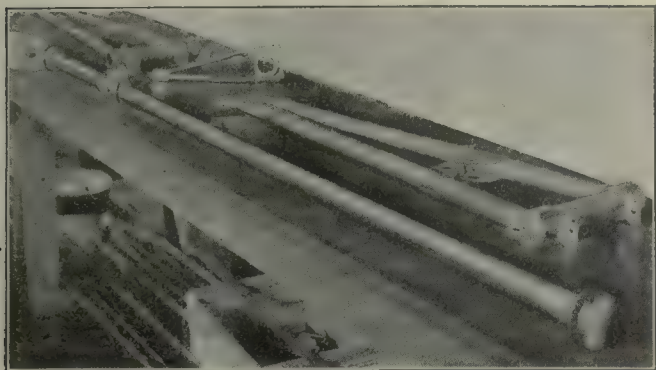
LAYOUT BENCH FOR METAL PARTS
